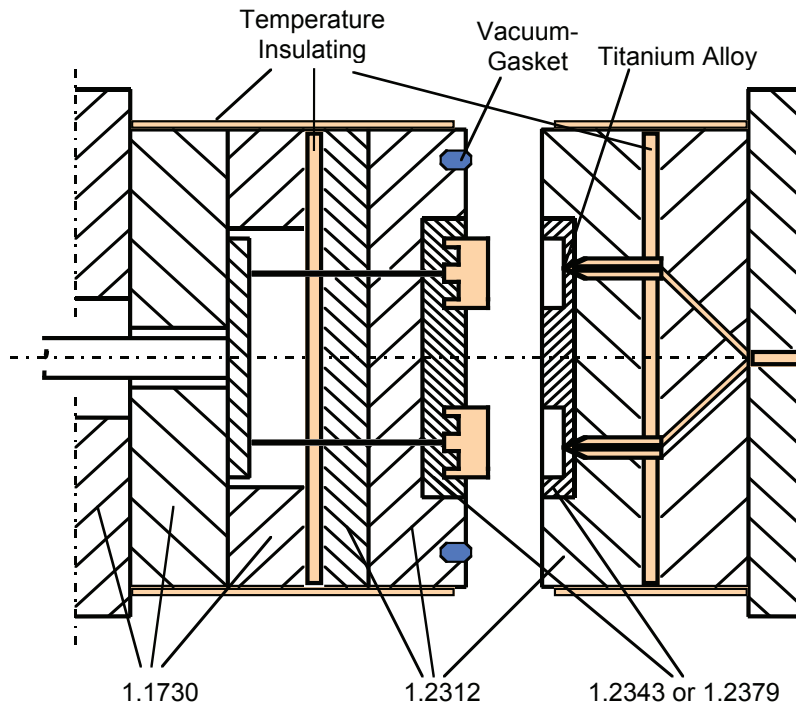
Sketch of a coldrunner mold for silicone rubber
